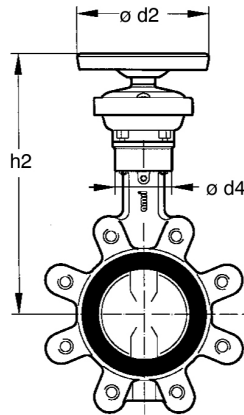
Unit comprising BOAX-SF + MA manual gearbox
